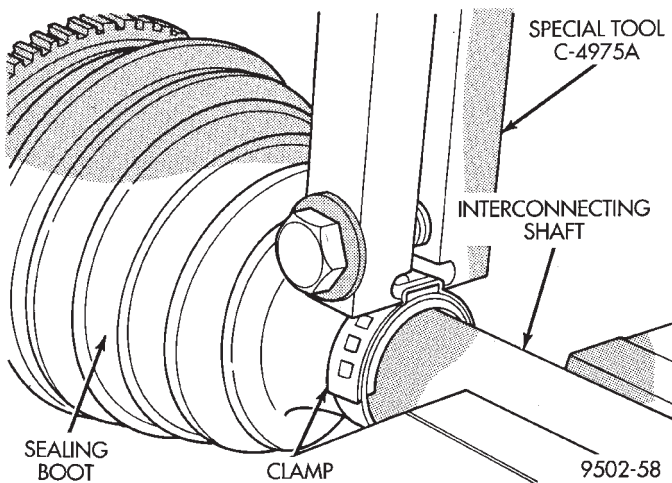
Crimping Tool Installed on Sealing Boot Clamp
